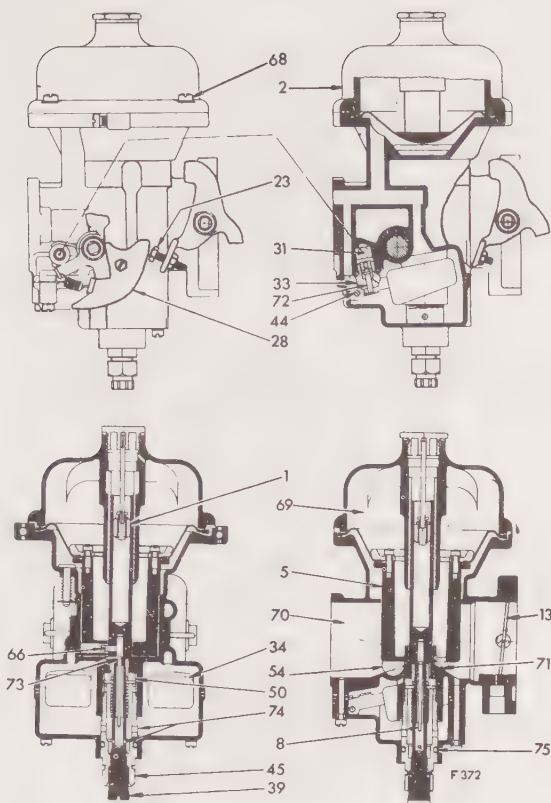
30 Sectional view of Stromberg carburettor. (For certain part numbers refer to Fig 2:27. Remainder below.)
